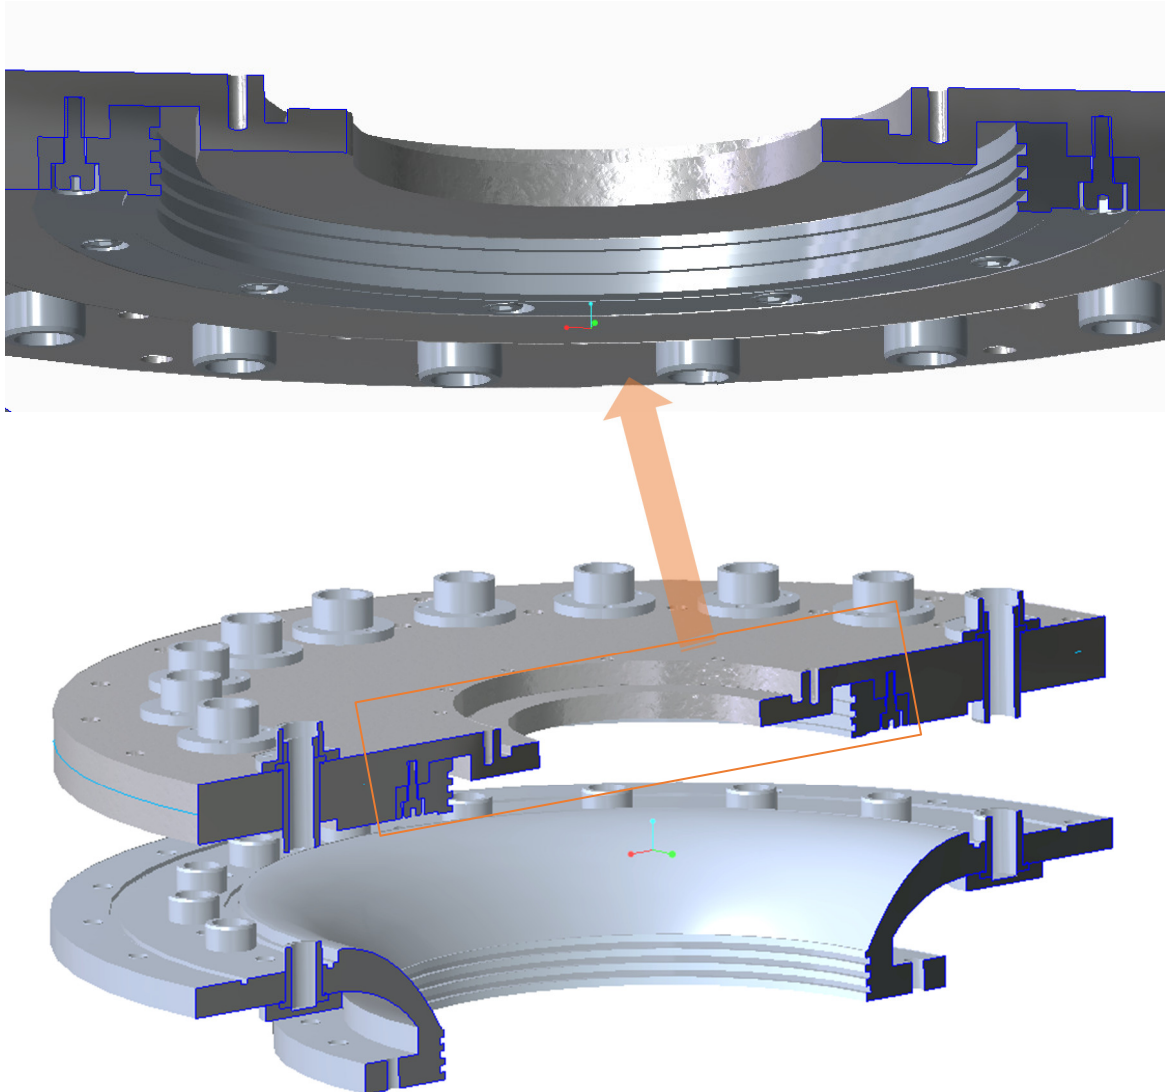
TTL Head Covers with Guide Vane Bushings and Covers
